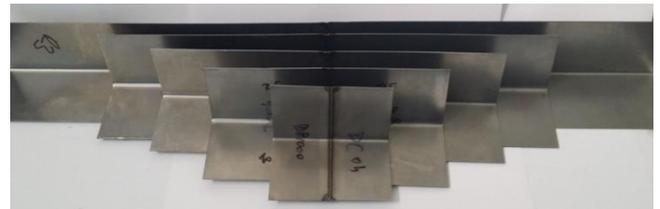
Different length bent parts made of tailor welded blanks
